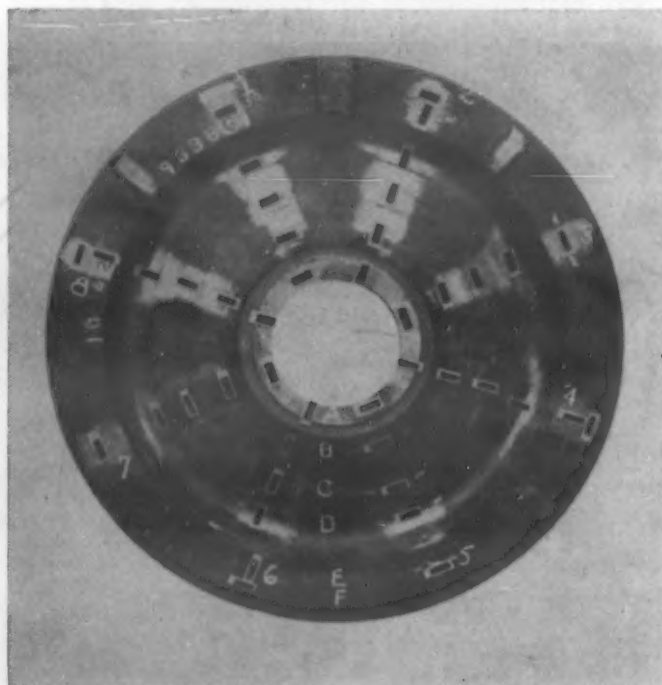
Wire strain gages mounted on a railway car wheel prior to cutting up the wheel for a residual stress analysis.
